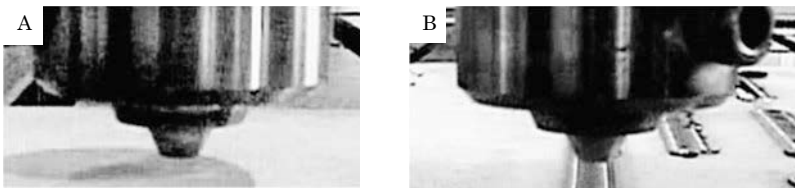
Appearance of the tool (A) before FSW and (B) after a 500 mm FSW.
